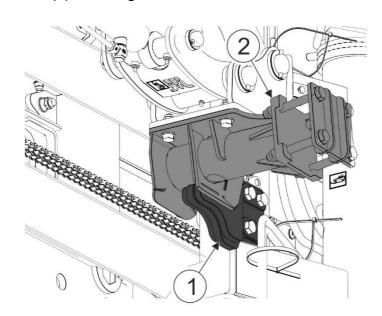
Mounting of the working head connection on the working head hitch.
